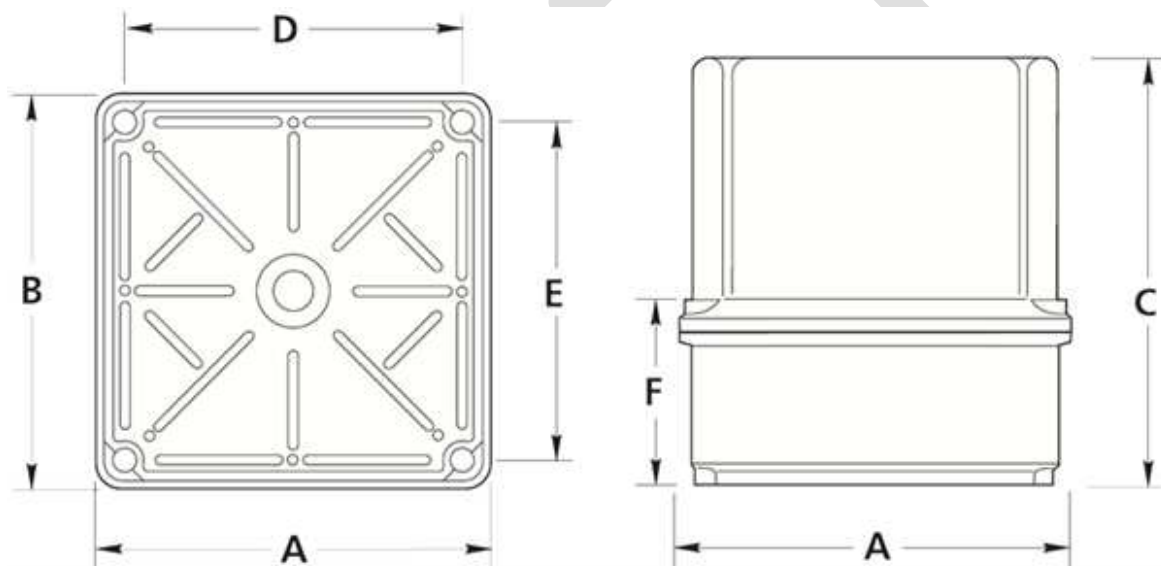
Esprit Intelligent Control Box (v1.2) mechanical drawing with mounting points highlighted.
